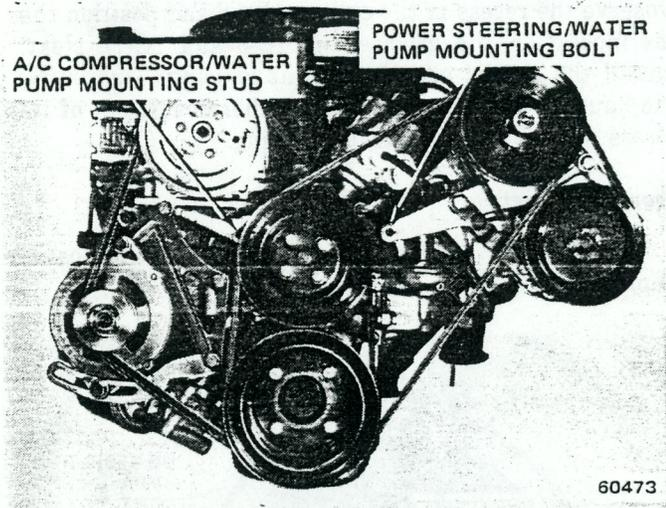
C-4 Water Pump Removal—Eight-Cylinder Engine
